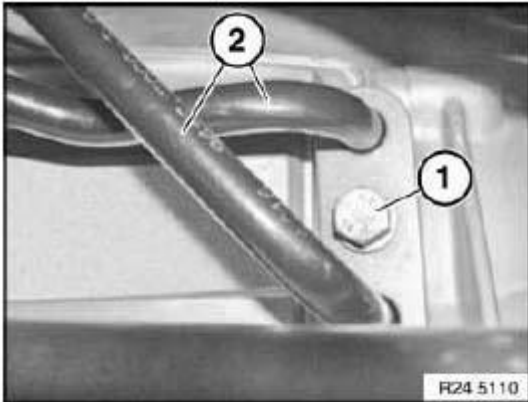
Identifying Transmission Fluid Cooler Hydraulic Lines And Screws
